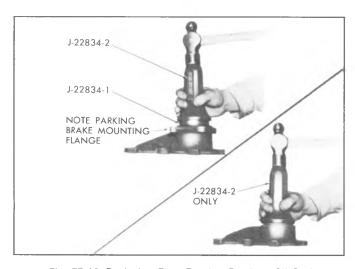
B-19--Replacing Rear Bearing Retainer Oil Seal
